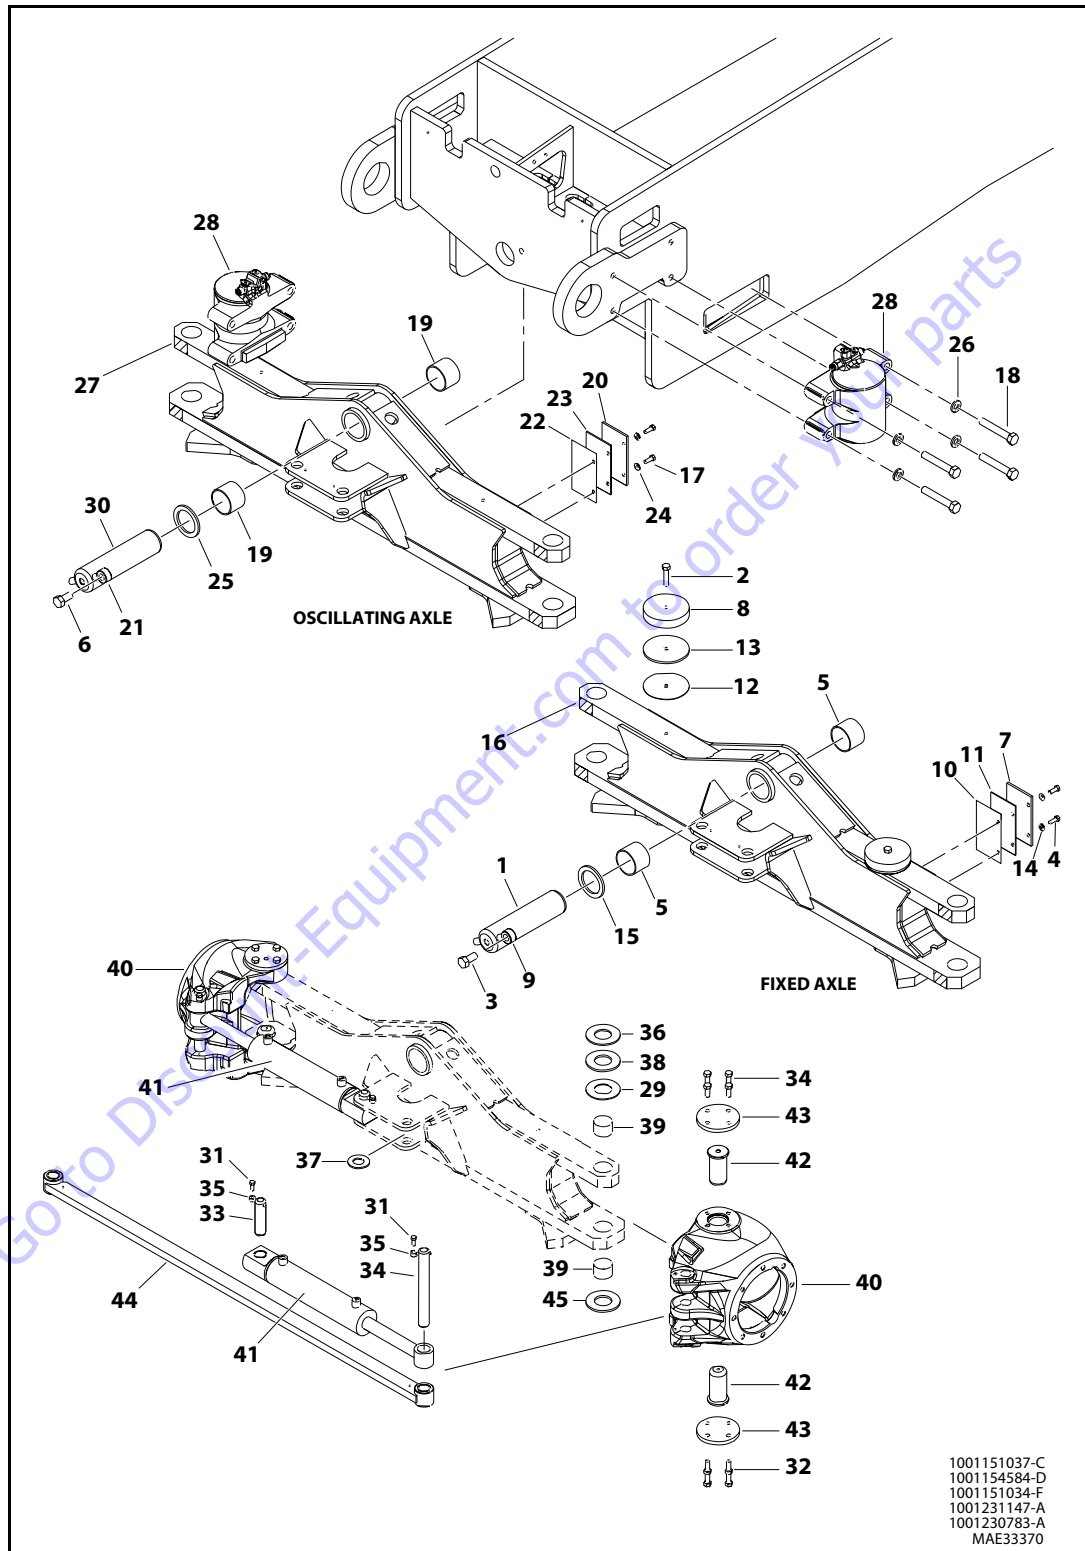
Axle and Steering Installation without Tow Package- Sheet 1 of 2
